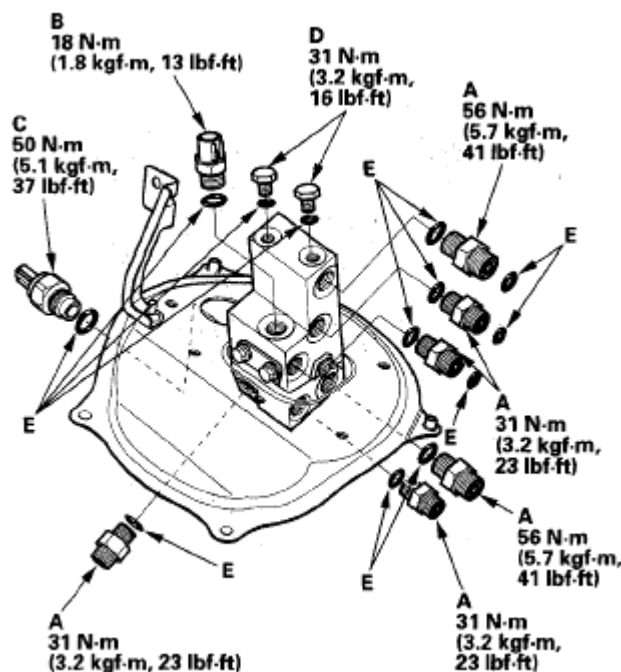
Exploded View Of FTT And FTP Sensor With Torque Specifications
